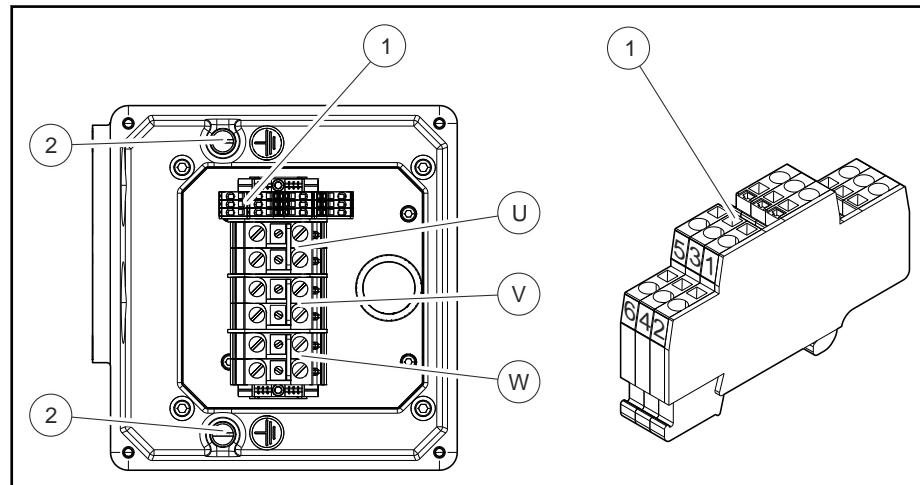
Tightening torque for screws in Nm in the terminal box
